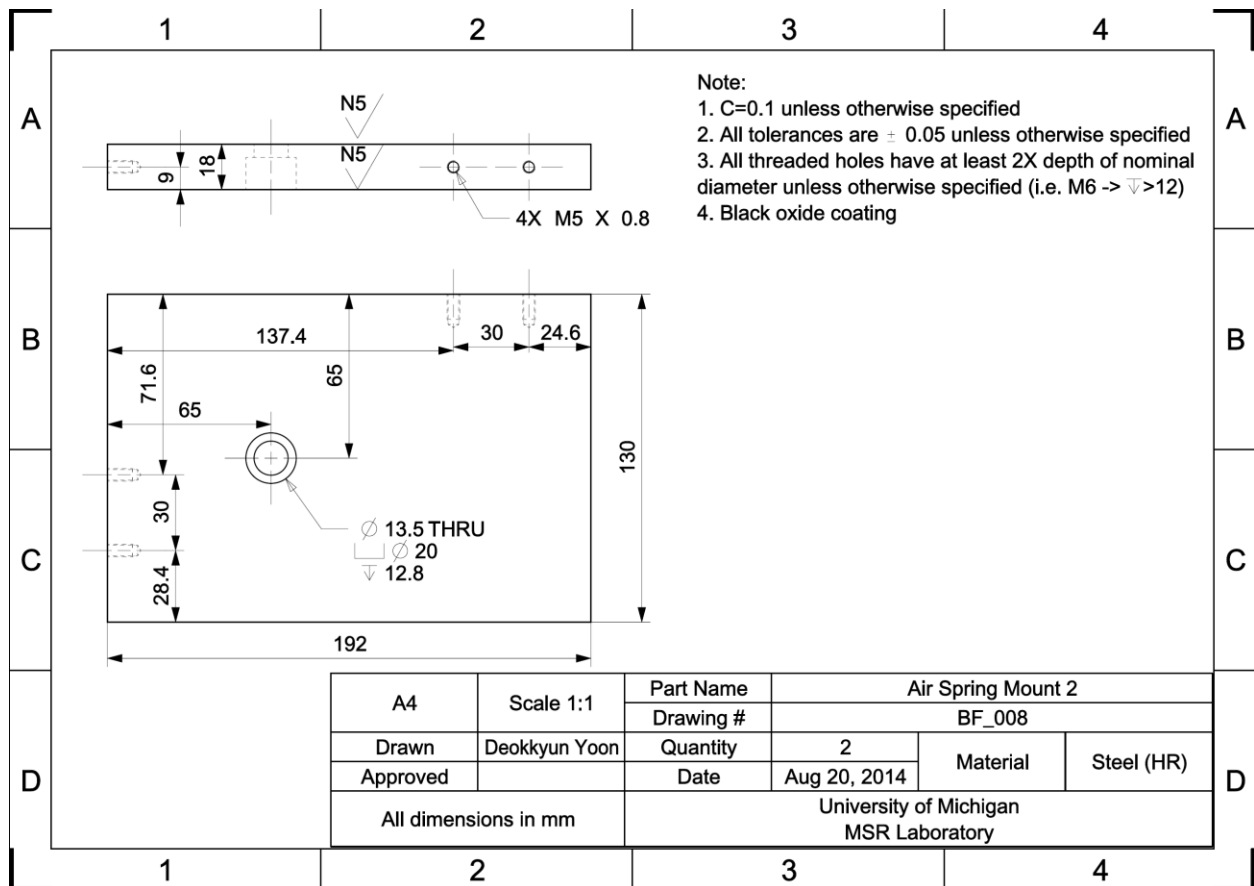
Manufacturing drawing of Air Spring Mount #2.
